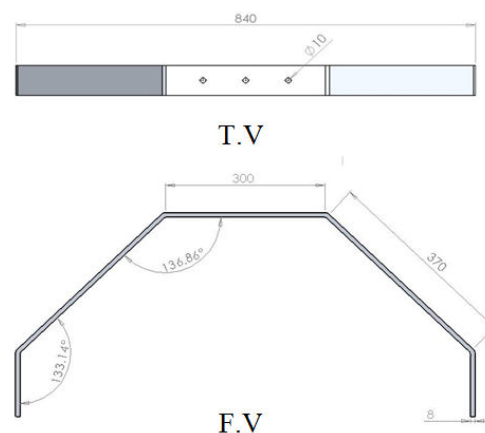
Geometry details of Model 1 (All dimensions in mm)
